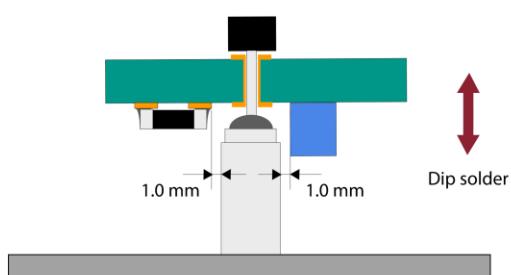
Restricted area for SMD components. SMD components are not recommended in the soldering area.
